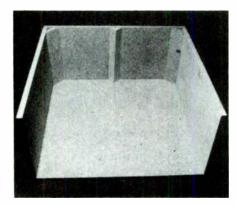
FIGURE II: While the glue sets on the manifold assembly, make the outer box module. Note the corner reflectors.
